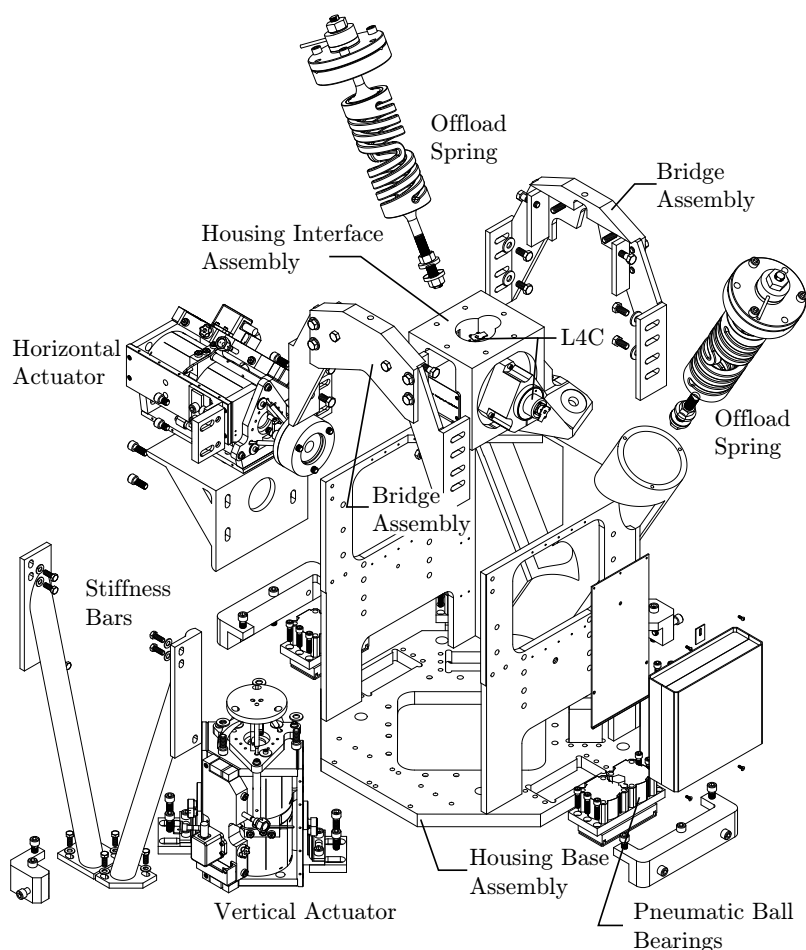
An exploded view of the HEPI housing. Courtesy of Oddvar Spjeld.
